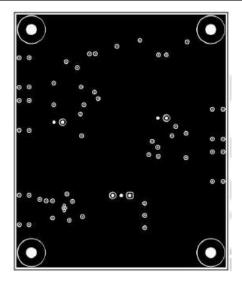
PCB Layout Example From LMK6 EVM - GND Layer 2
